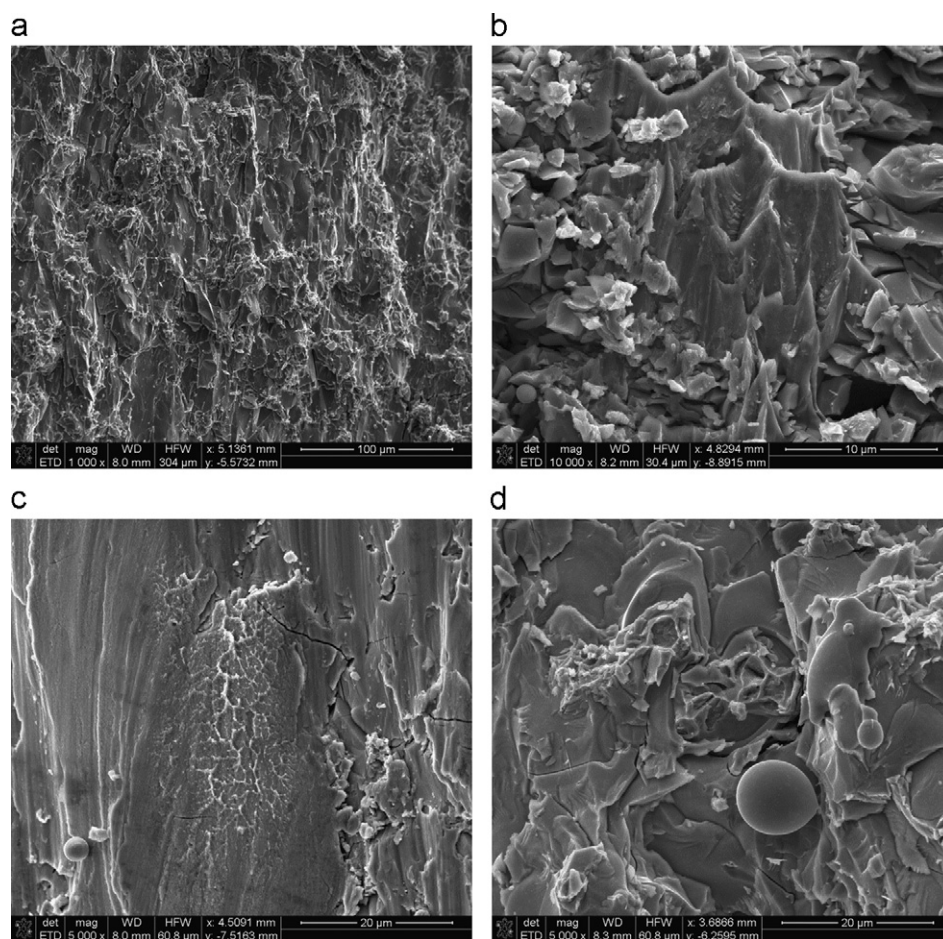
The fracture surface of the CrNbTiZr alloy fractured at room temperature during compression deformation. The compression fracture strain is 3%. (a) Low magnification and (b) higher magnification images illustrating a mixed type of fracture consisting of plastically deformed dimples and brittle fragmented particles. (c,d) Regions on the fracture surface of the CrNbTiZr alloy sample indicating local sample melting during fracture.
